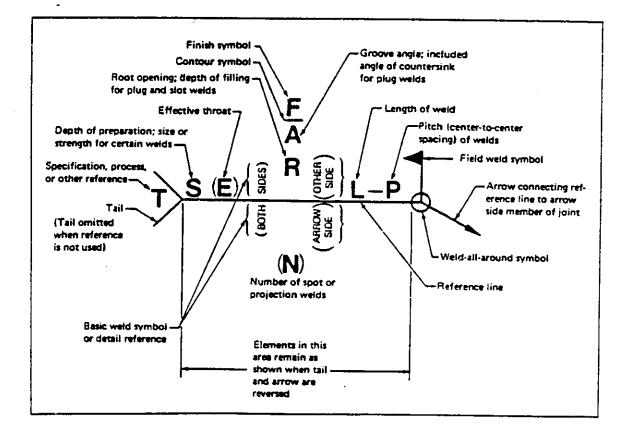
(a): STANDARD LOCATION OF ELEMENTS OF A WELDING SYMBOL
